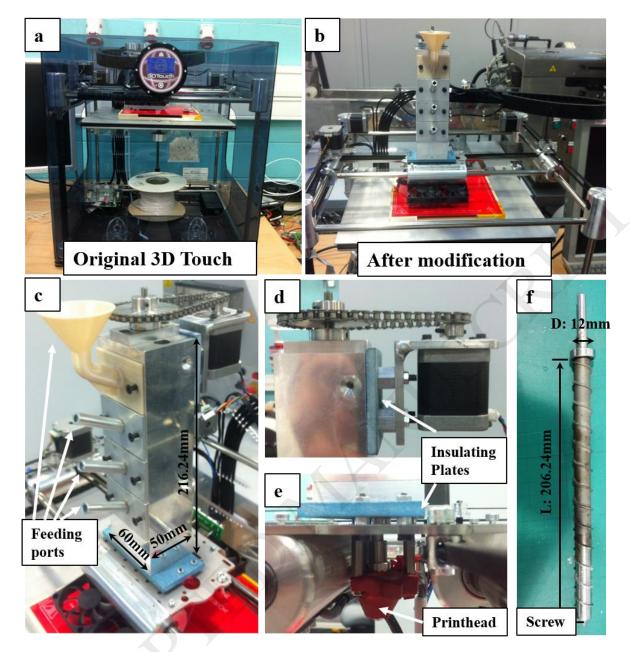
Modification of a FDM machine: (a) the original 3D Touch FDM machine; (b) pellet-fed material extrusion machine, modified from the 3D Touch; (c) the barrel and multiple feeding ports; (d) a stepper motor controlling the rotational speed of screw; (e) the printhead connected to the extruder; and (f) the single screw.
